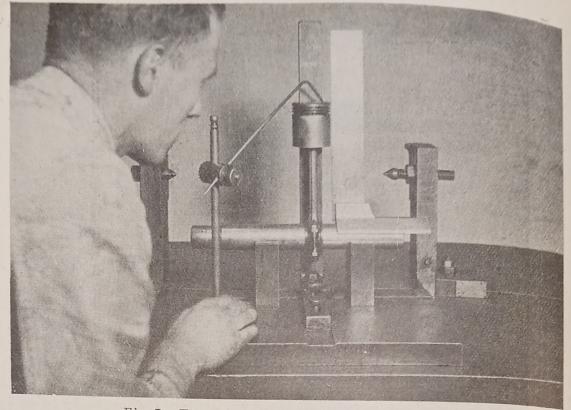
Two ways of checking piston alignment Across the top with a scribing block and up the side with a square.
